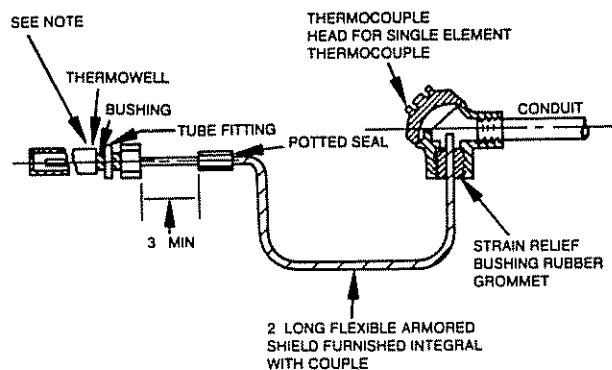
Metal-Sheathed, Mineral-Insulated Thermocouple Assemblies
